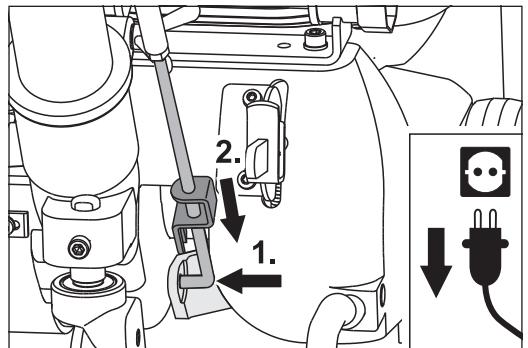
Put the lower rod in the hole of the lifting fixture (1.) and fix them with the closure (2.).
